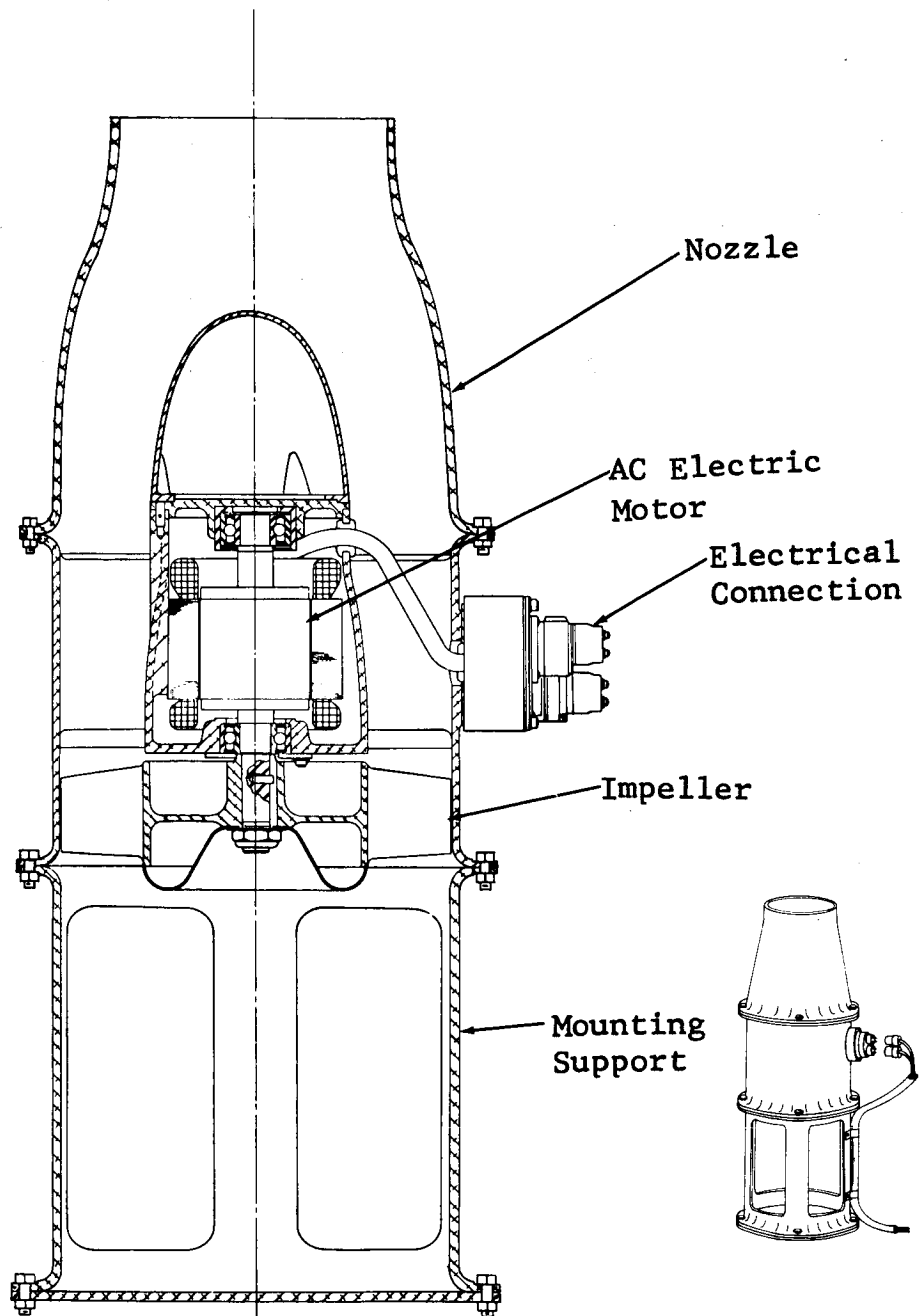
Vane Axial Pump, Nozzle, and Mounting Supports
